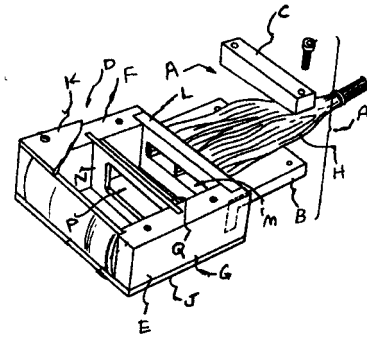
A typical example of the subject matter. A- Clamping assembly with support plate "B"; B- Support plate; C - Clamping block; D - Illumination device; E- Housing; F, G - Housing optic bundles; H - Fiber-optic bundles; J, K - Housing top and bottom plates; L - Housing end wall; M -Opening for fiber bundles "H"; N - Aperture plate with aperture "P"; P - Aperture; Q - Polarizer
